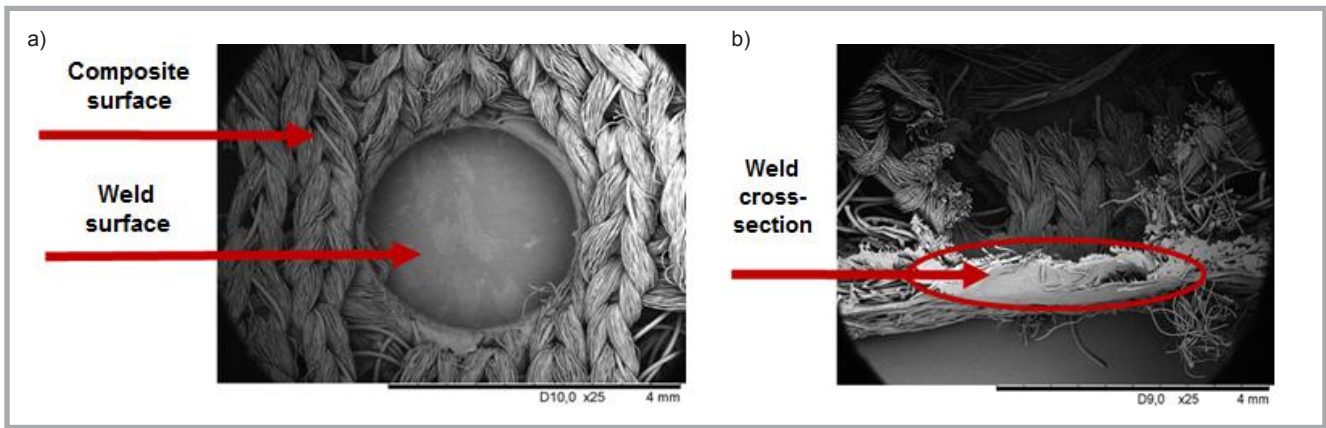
Weld surface morphology a), Weld cross-section b) (SEM images).
